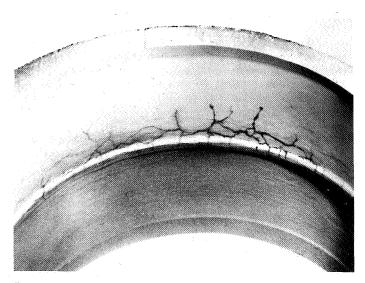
Stress-corrosion cracks at ferritic dead leg in a dissimilar metal weld.
